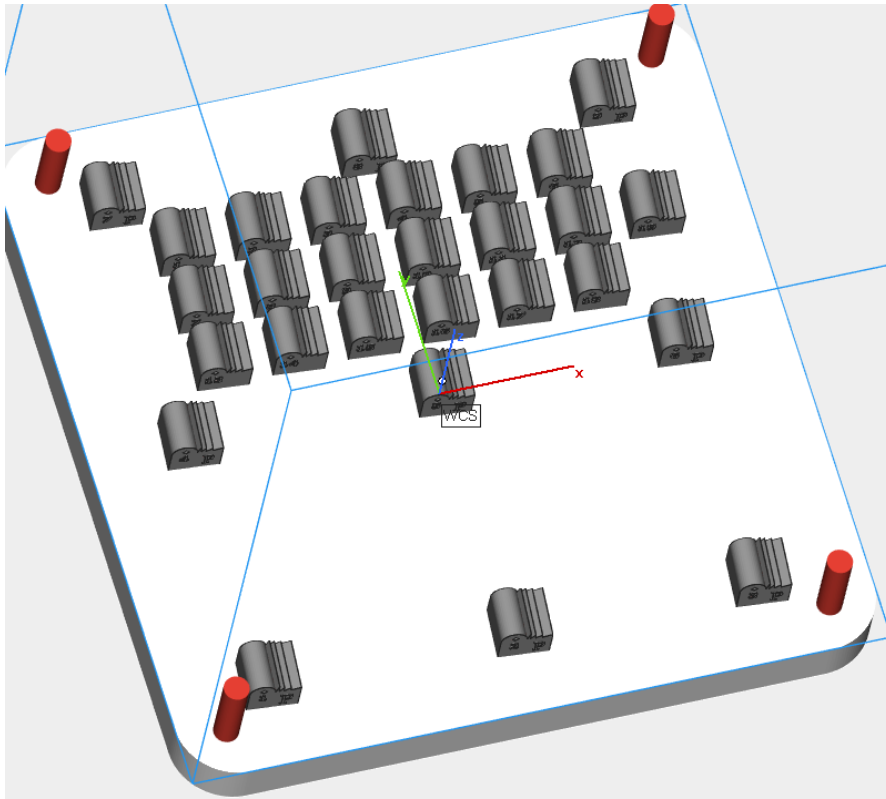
DOE job layout for MP1 and 316L consisting of only porosity test parts
